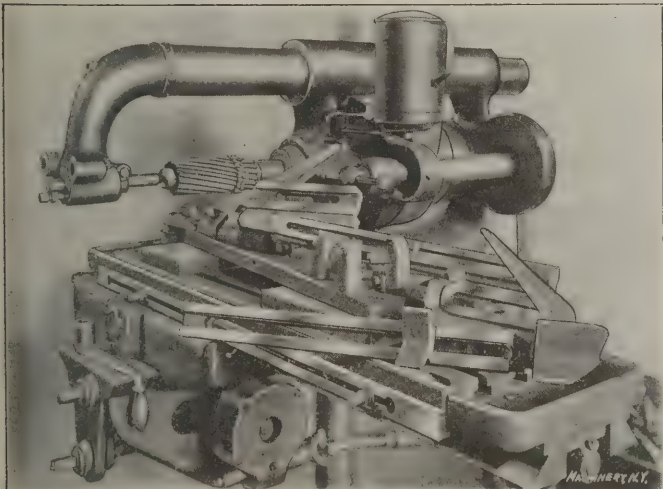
Work on which the Milling Machine is Superior to the Planer.
